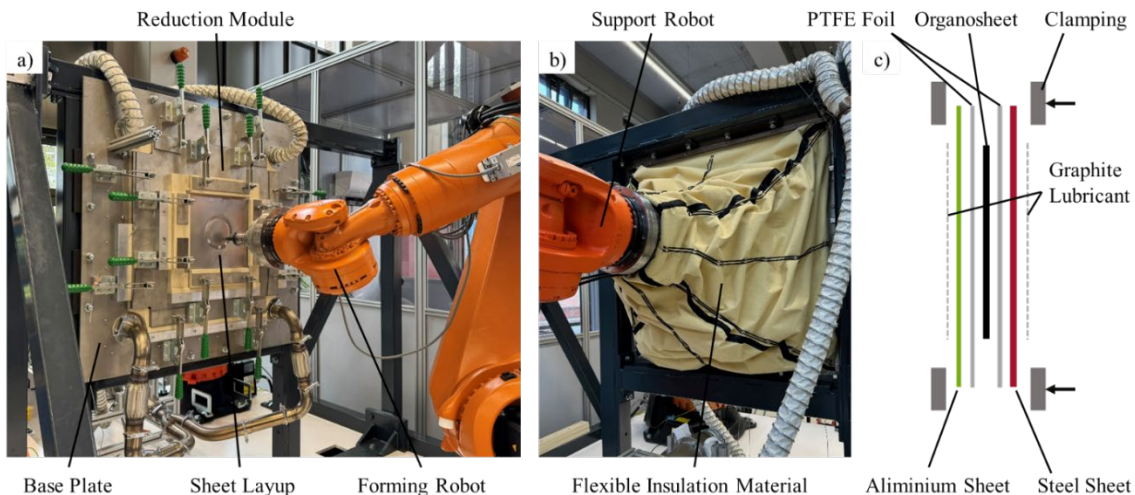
Hot DSIF Setup for FRTP forming – a) front view with reduction module and clamped sheet layup, b) back view with flexible insulation material (right), c) illustration of sheet layup.
